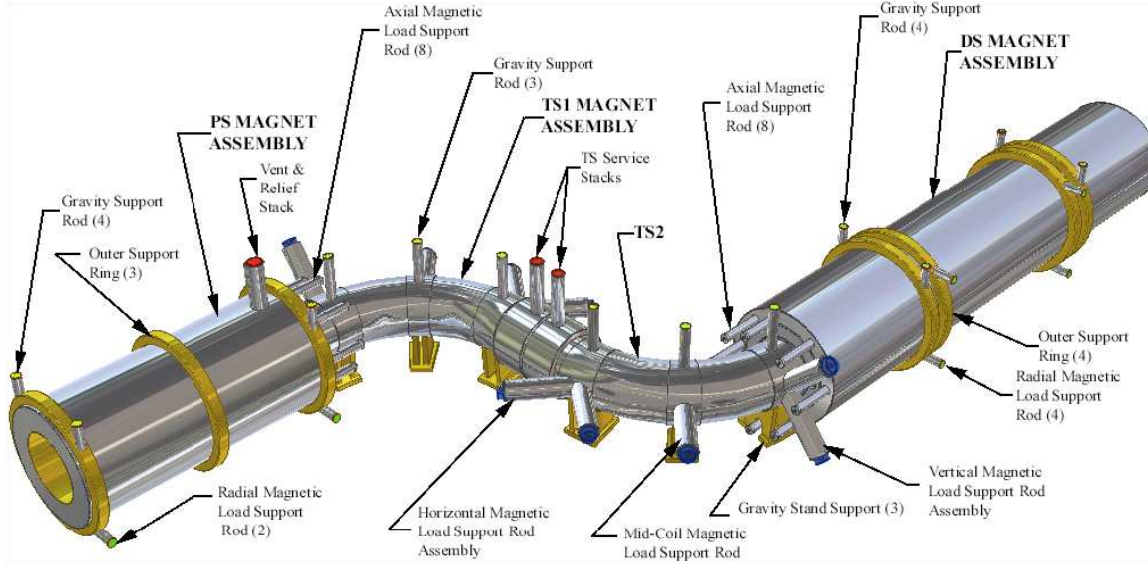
View of the assembled magnet system. (Taken from Ref. [122].)
